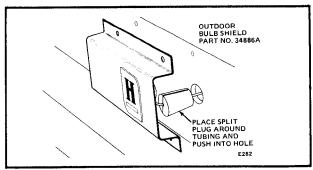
MOUNTING THE OUTDOOR BULB GUARD TO WALL.
